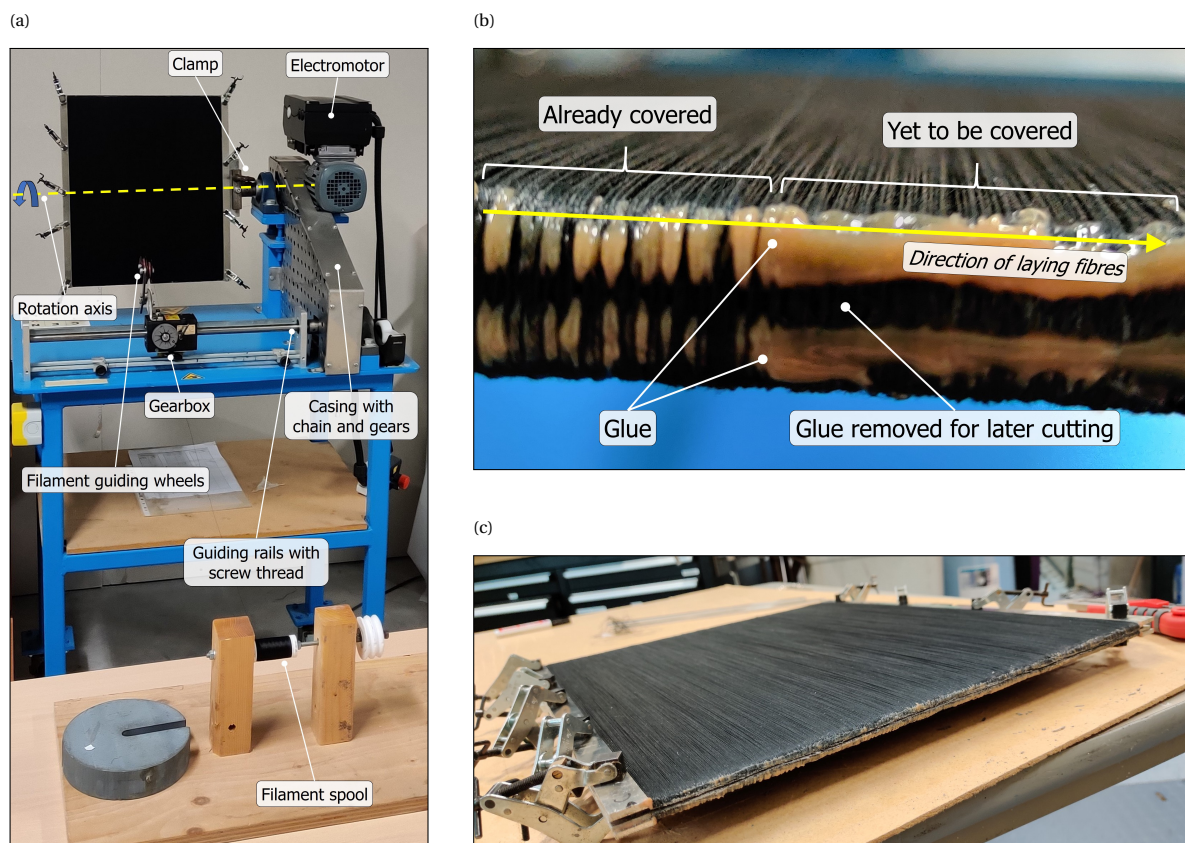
Filament winding and cutting procedure. (a) Filament winding setup at Centexbel. (b) Close-up view of plate front-edge with glue. (c) Cutting through the fibres at the plate front-edge.
